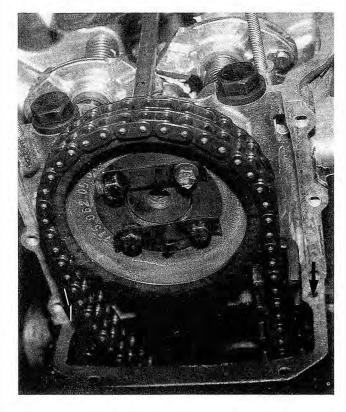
Apply enough sealer to fill bores (arrows).
